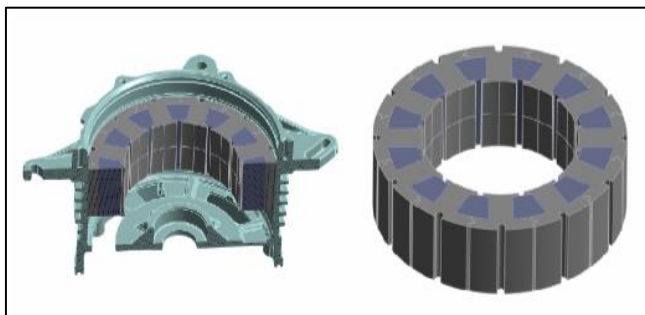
Motor Assembly and Stator Assembly with Simplified Winding
